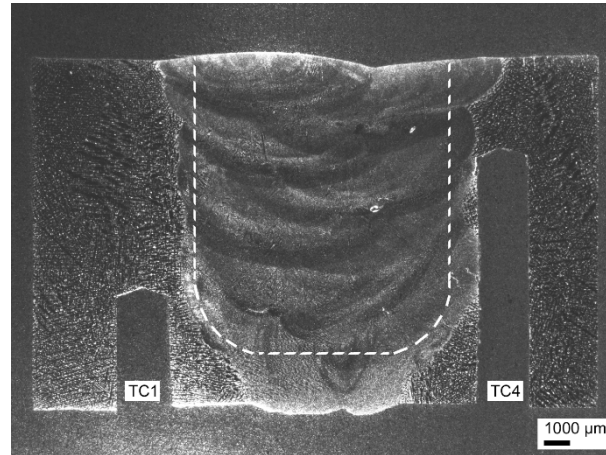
Cross section of groove 4 showing the position of TC1 and 4 relative to the weld. Original groove position indicated by dashed line.
